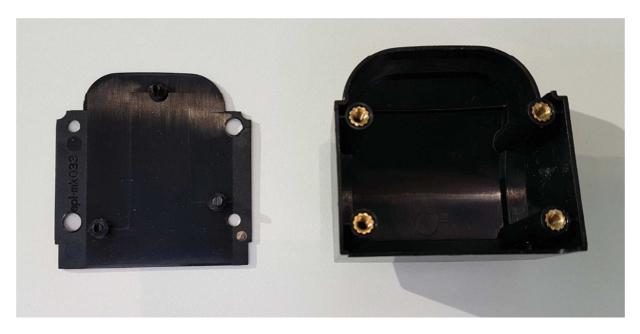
Rear view of Radio Module cover removed from main housing and PCB
